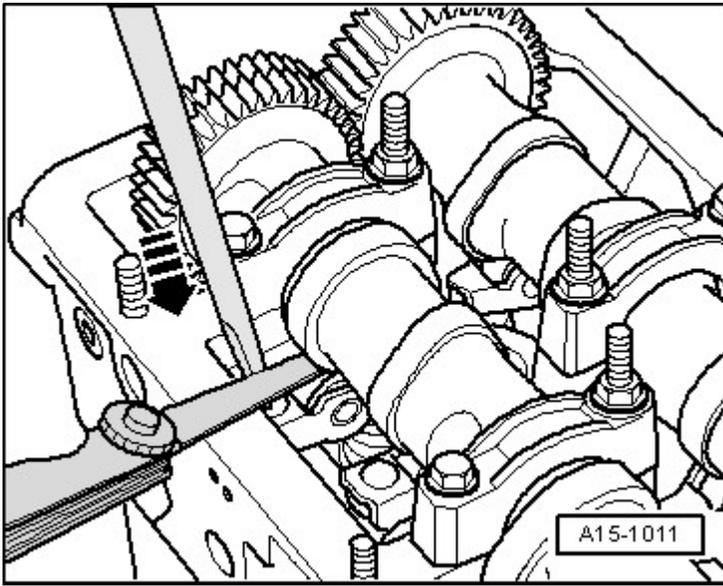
Identifying Play Between Cams With Screwdriver -Arrow- And 0.20 mm Feeler Gauge
